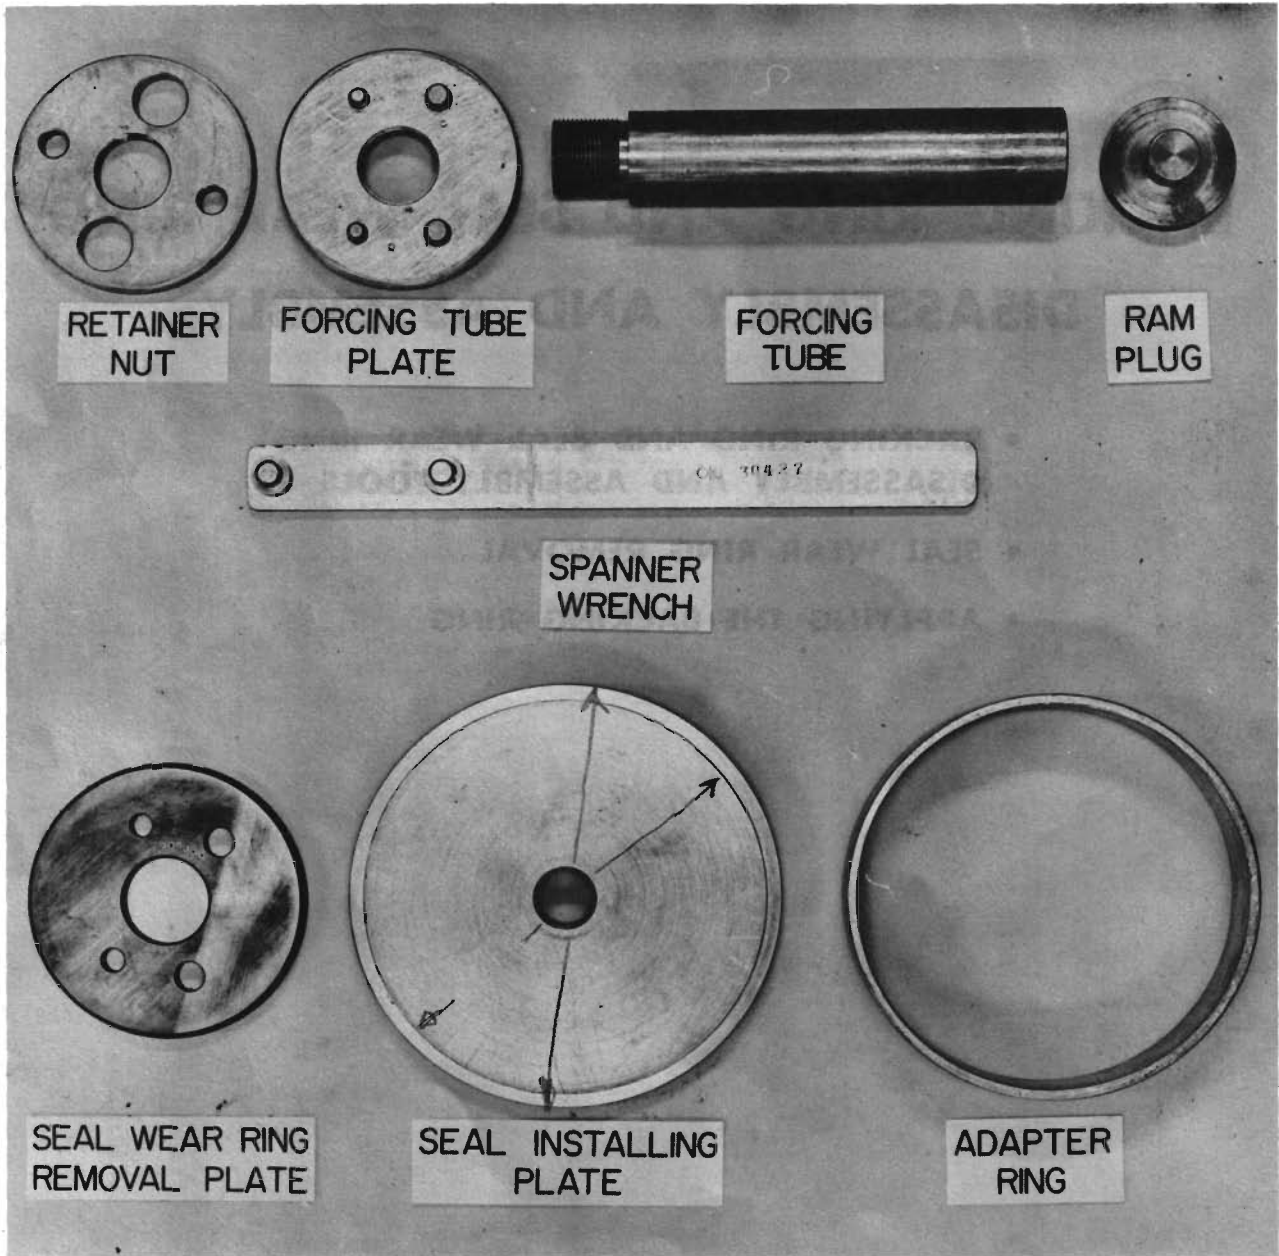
Tools Required for Removing the Seal Wear Ring and Applying the Backing Ring with a Small Press.
